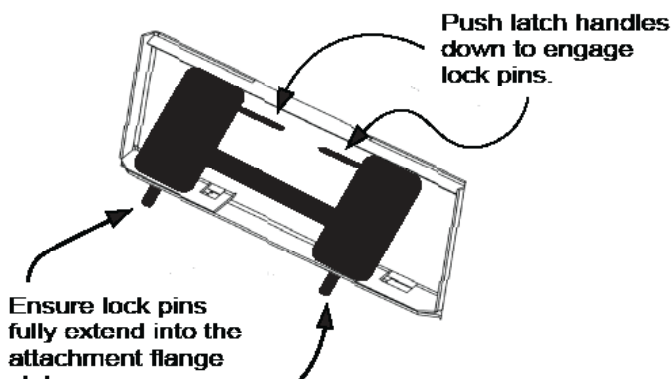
B QUICK ATTACH COUPLER LOCKED TO ATTACHMENT PLATE
